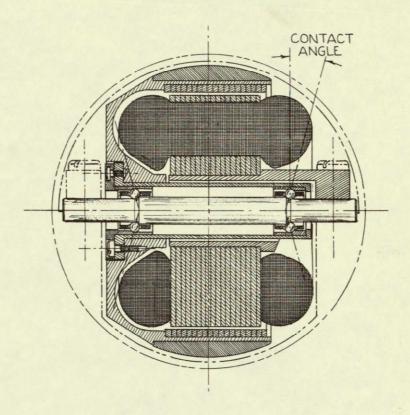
DF PRELOAD – INTEGRAL SHAFT UMBRELLA SHAPED WHEEL
